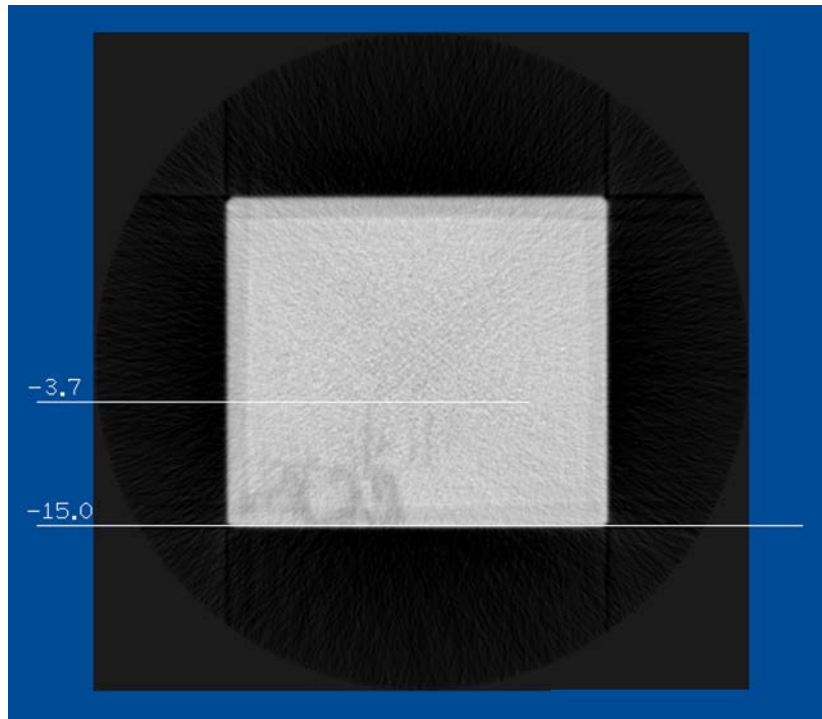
CT-slice #26 (z=113.64 mm) of test block P29 (N 220 AD U 10), crack depth: 13.0 mm (+/- 2 pixel = 0.24 mm), 42.9% of weld thickness
